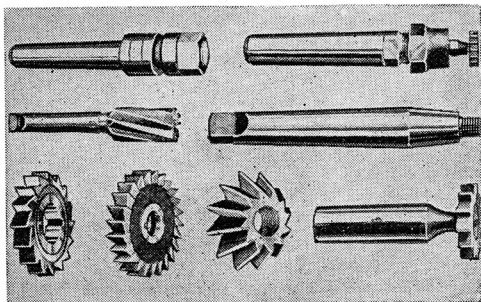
An assortment of milling cutters and arbors used in lathe work.
